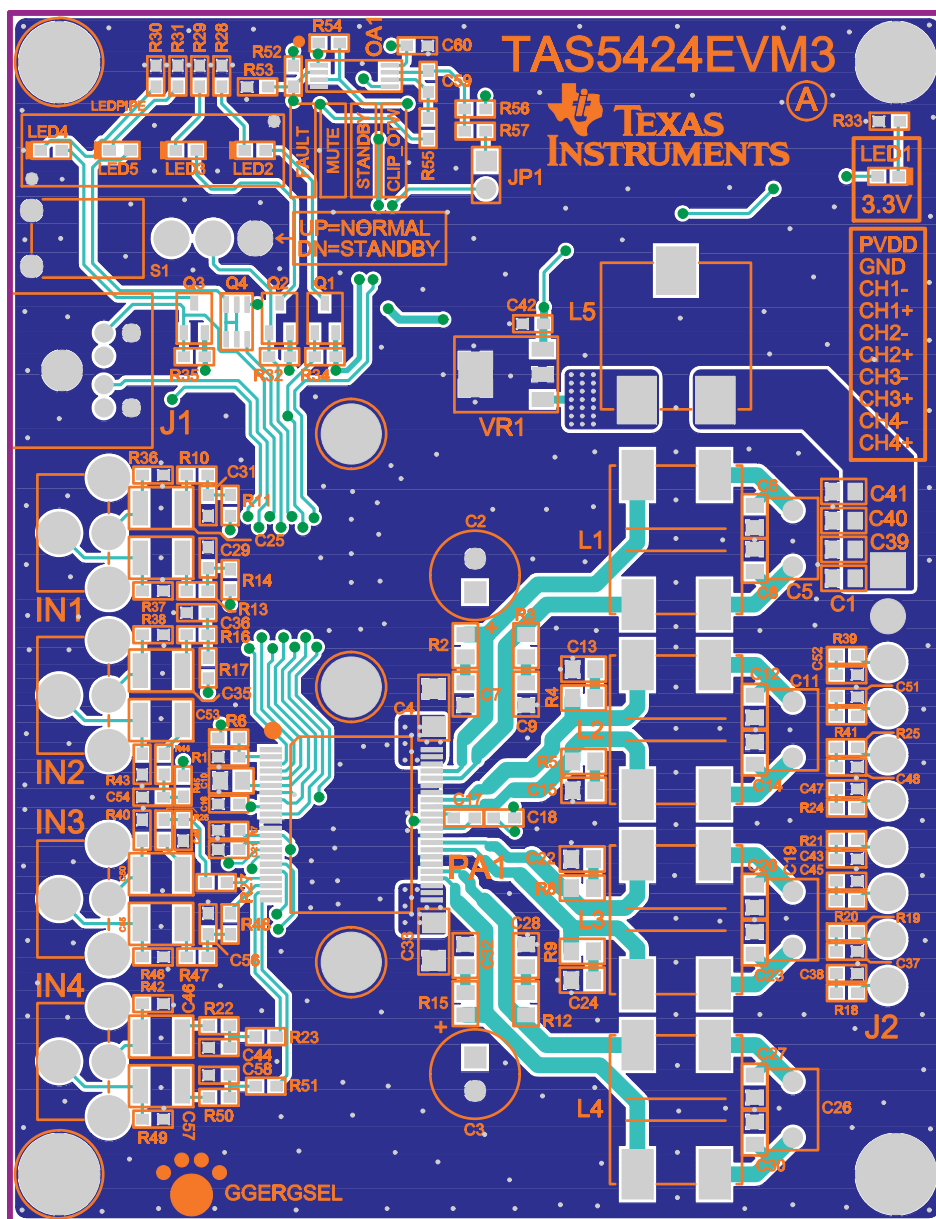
TAS5424AEVM3 Top Composite Layer
